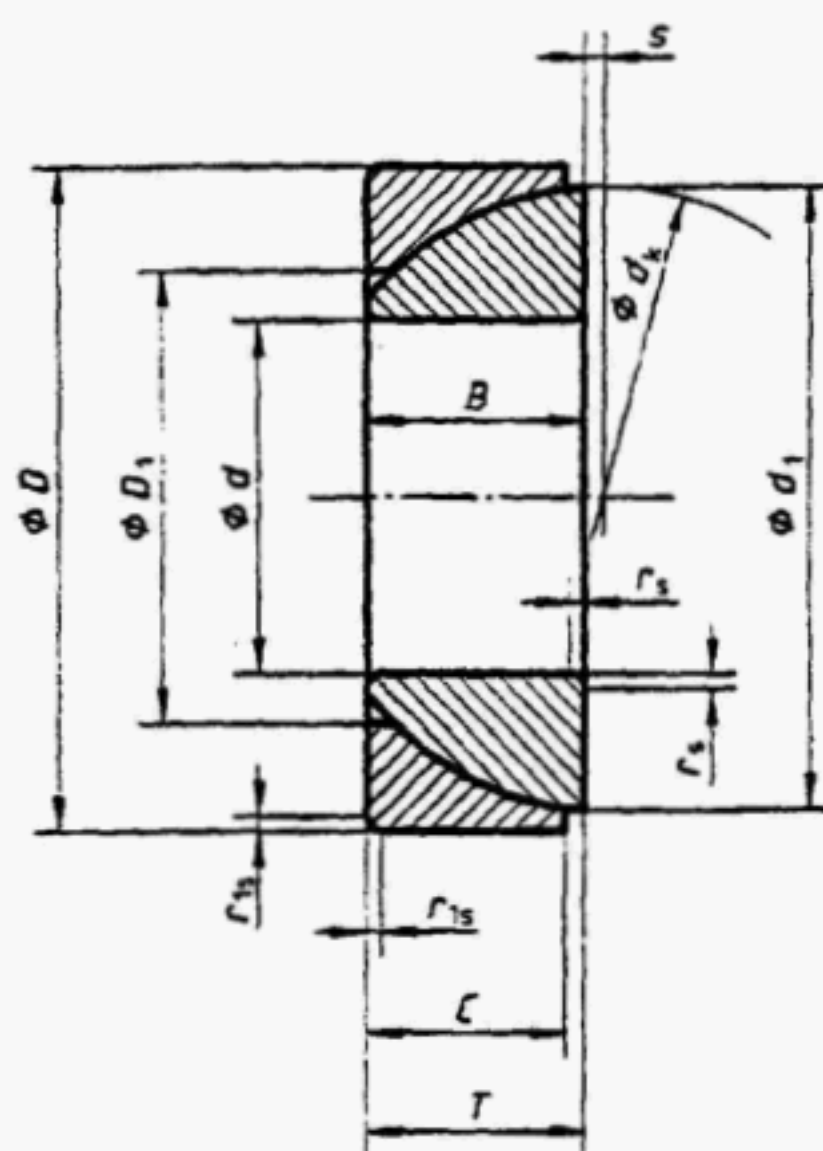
Angular contact radial spherical plain bearing, dimension series A
